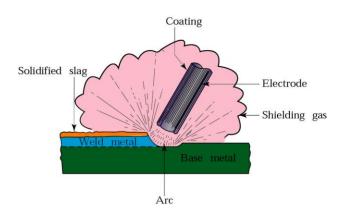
Schematic illustration of the shielded metal-arc welding process.
